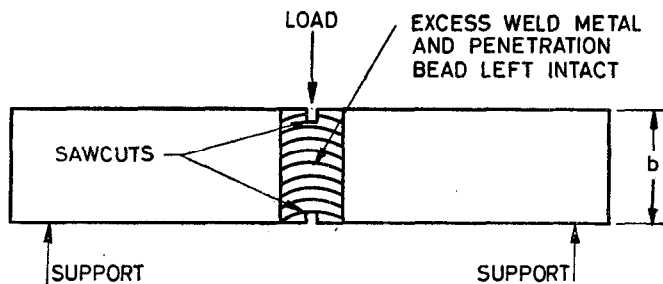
METHOD OF FRACTURING NICK-BREAK TEST SPECIMEN
